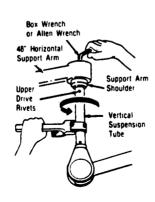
SCREWING/UNSCREWING VERTICAL SUSPENSION TUBE.
